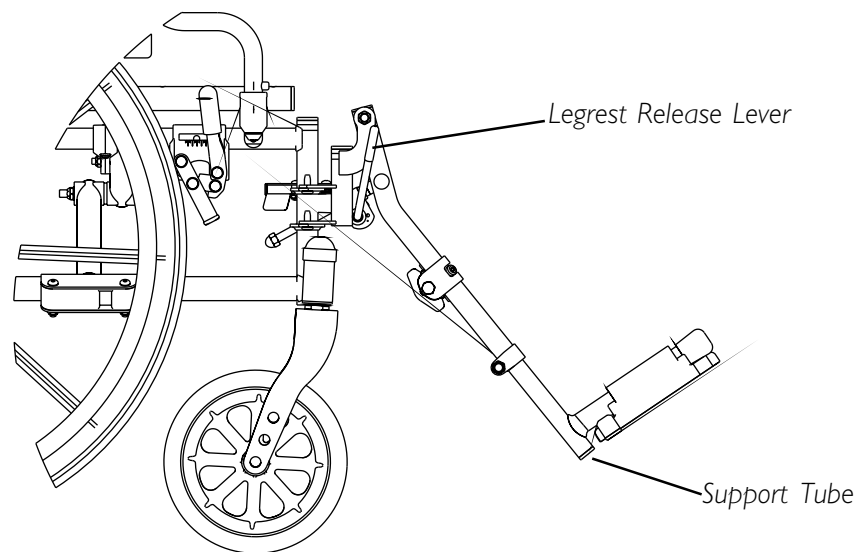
RAISING/LOWERING THE ELEVATING LEGREST ASSEMBLY
